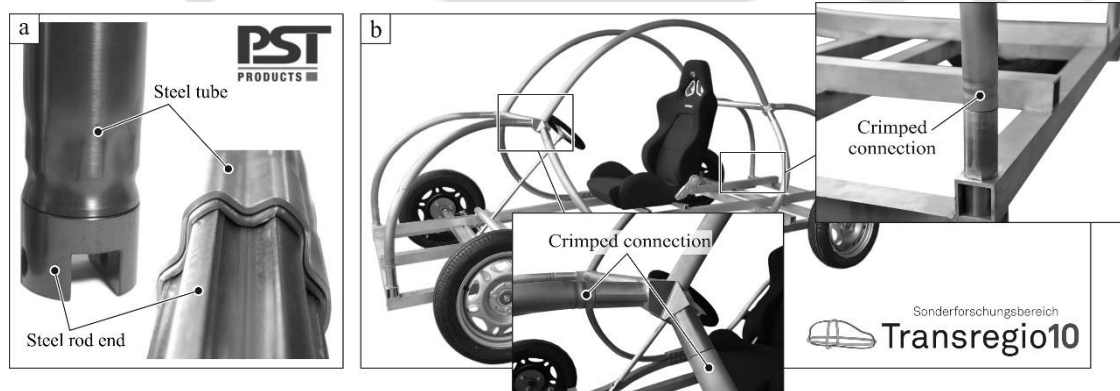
(a) Electromagnetically crimped driveshafts; (b) demonstrator space frame [37]
